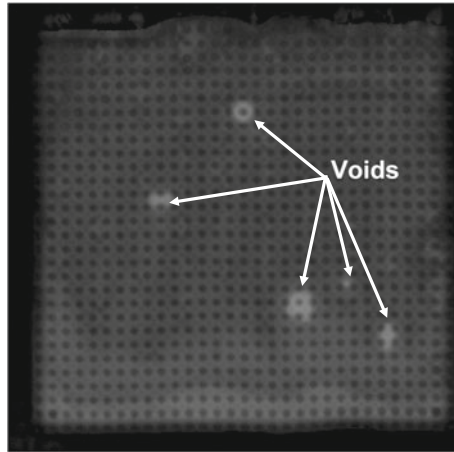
C-mode SAM image of underfill flip chip assembly with voids
